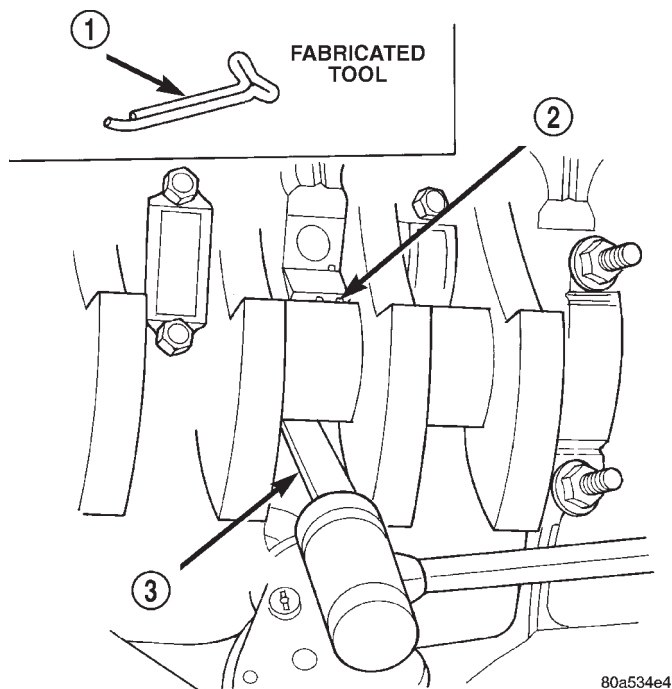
Removing Main Bearing Caps and Lower Inserts
